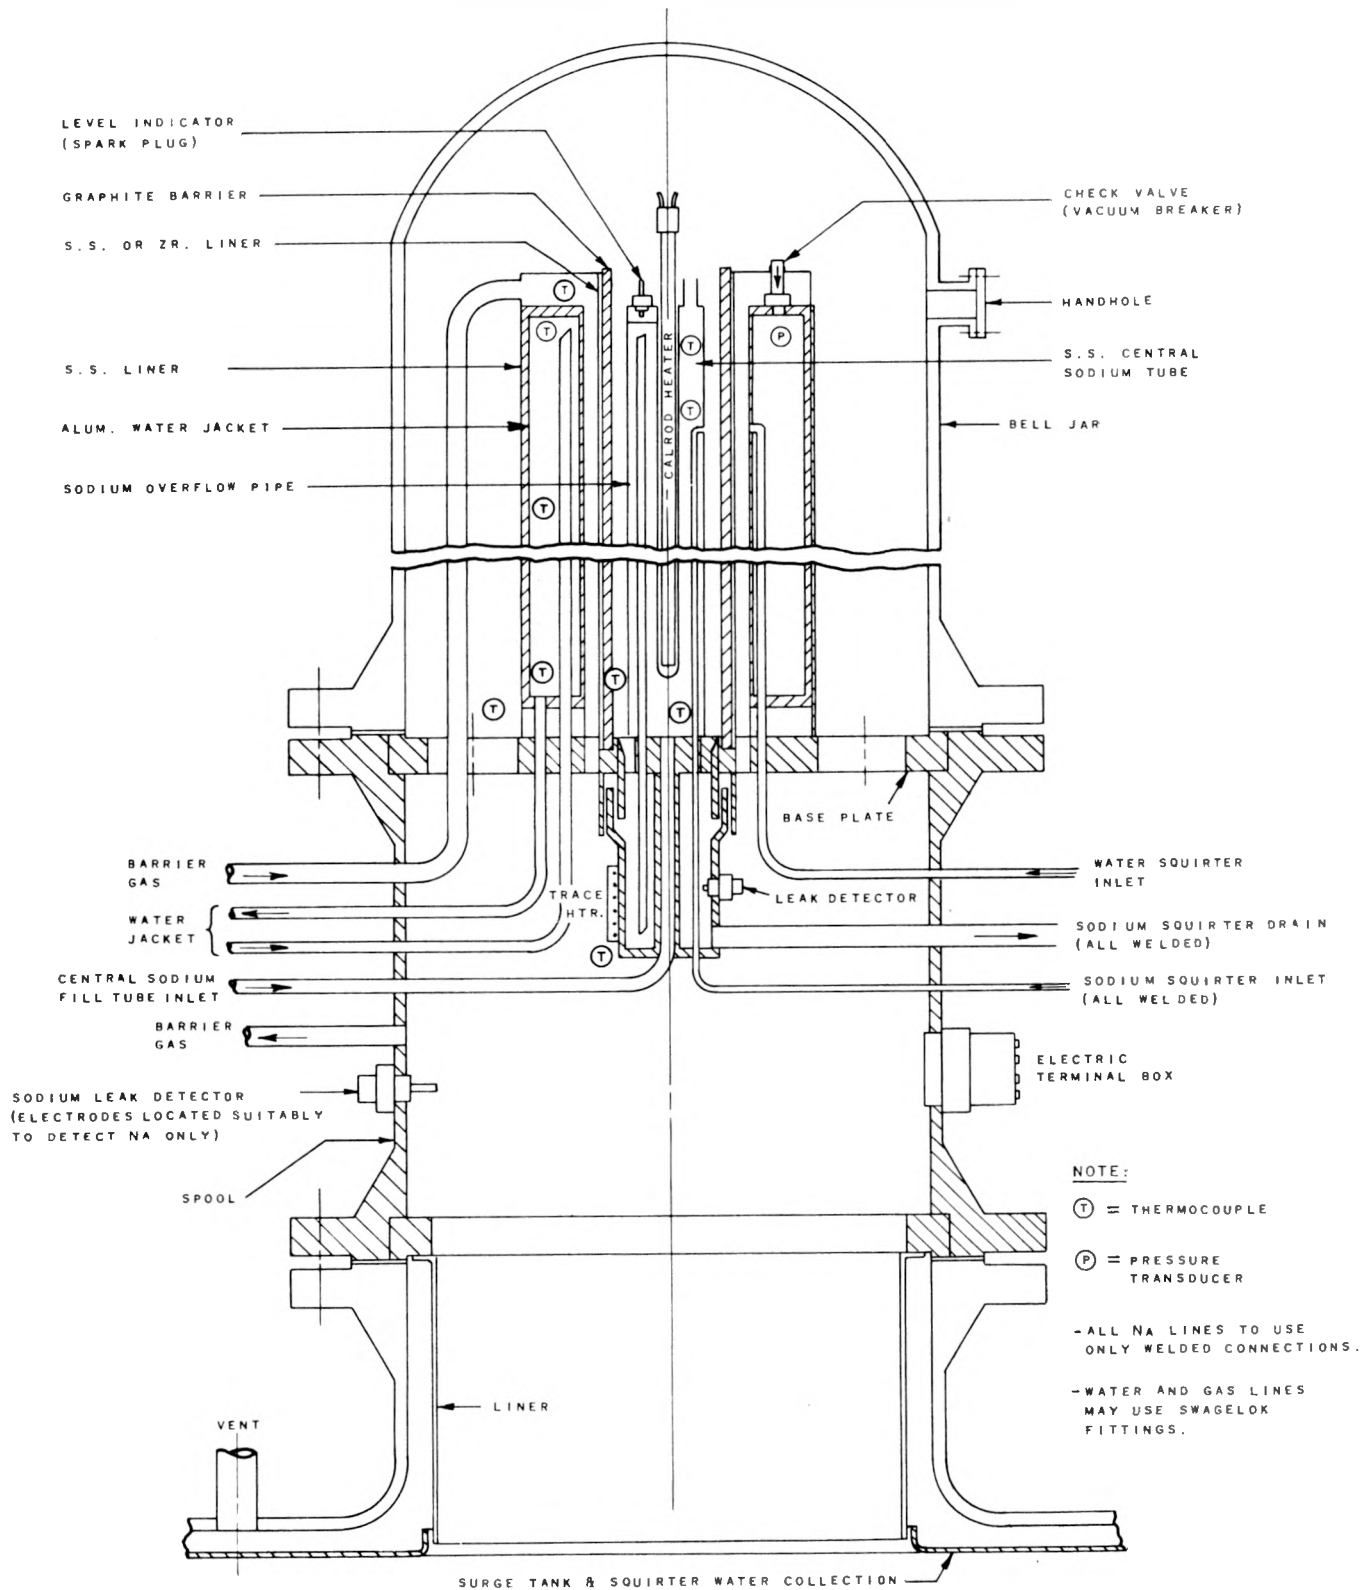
Preliminary test section design — multiple-failure test
